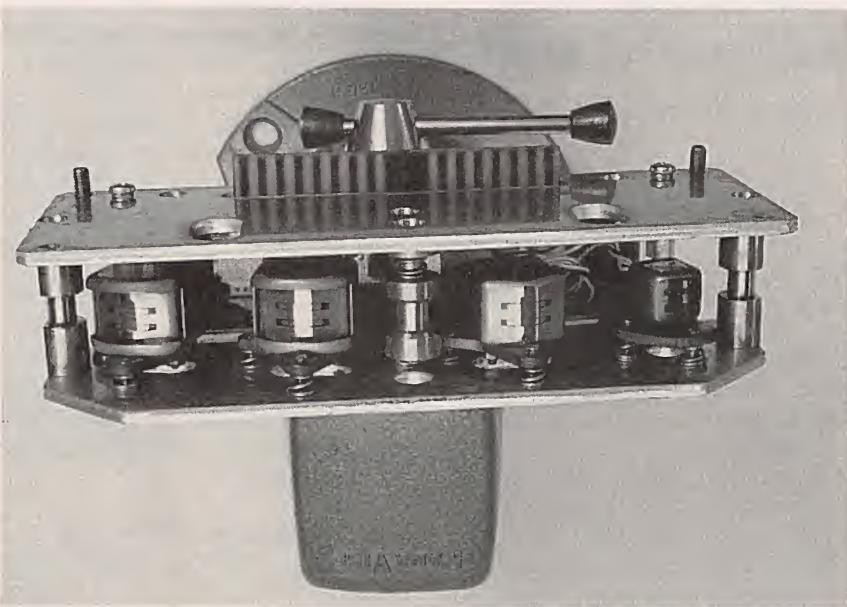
The various tape heads and guides found in the tape path of a typical audio-tape recorder. This particular head assembly is from an auto-reverse machine. It contains four heads: one each for 52
